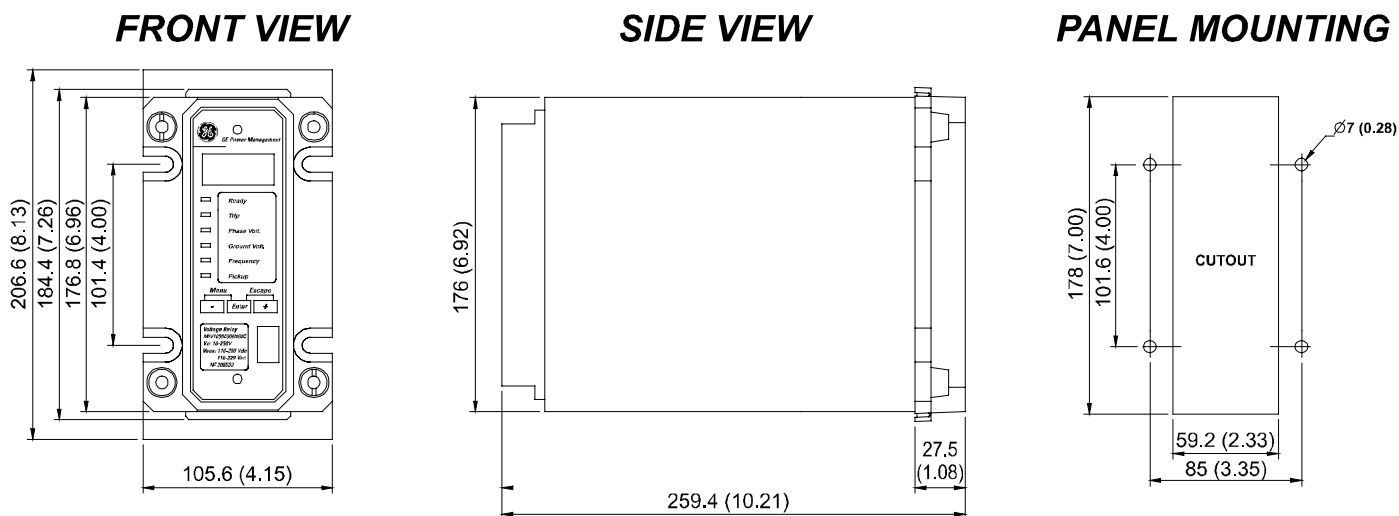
B. MOUNTING AND DIMENSIONS DRAWING FOR MIV MODELS WITHOUT DEPTH REDUCING COLLAR
